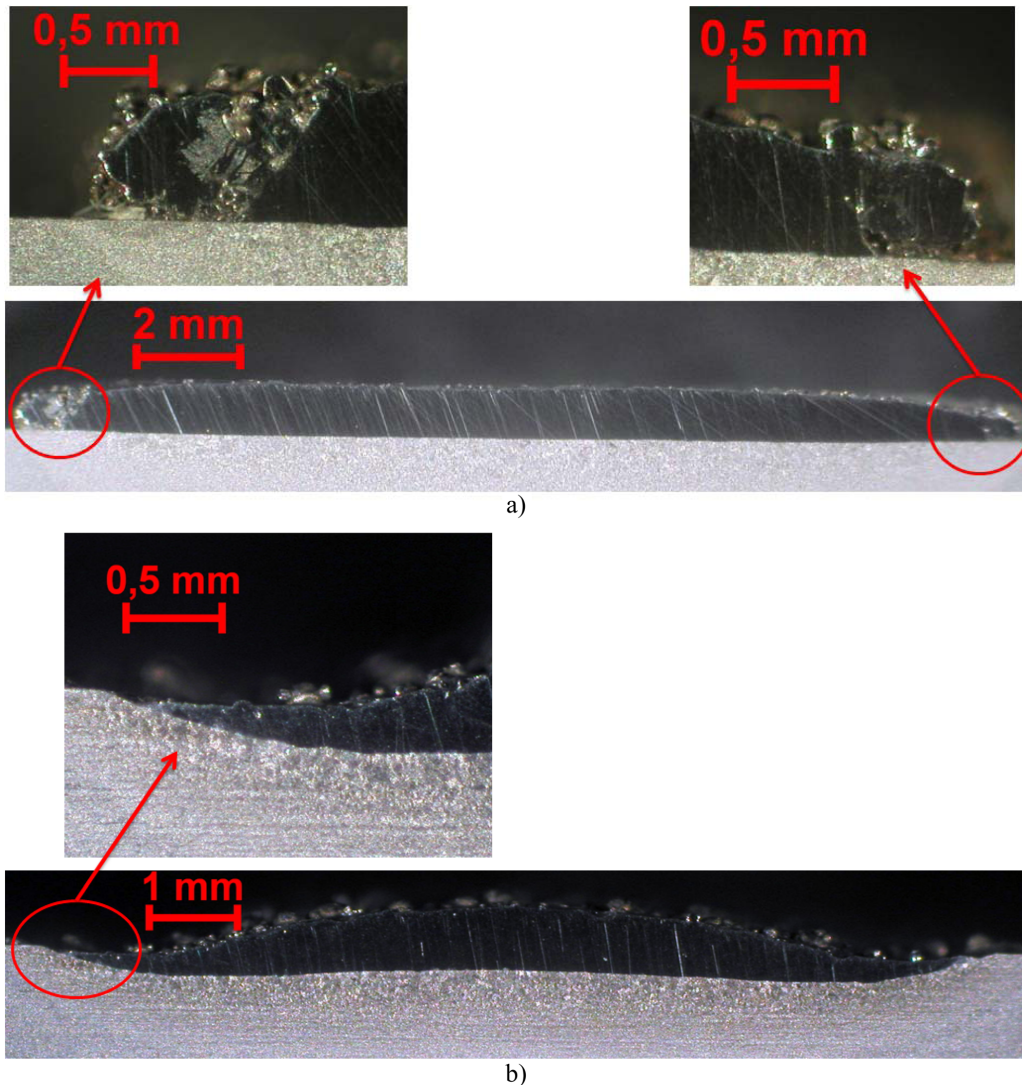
Defects formed in clad beads: (a) lack of fusion and (b) undercut.
